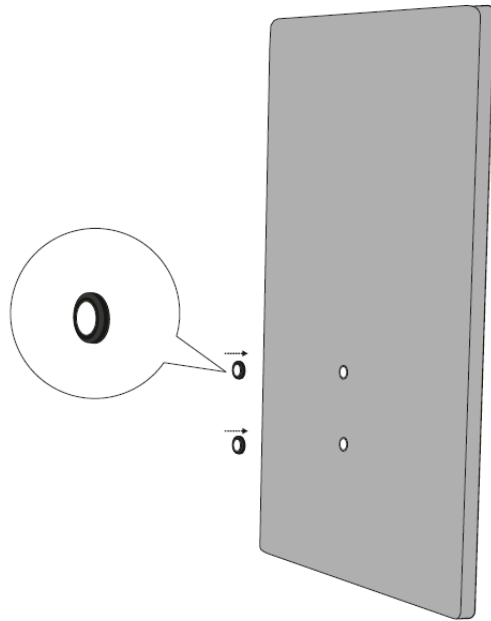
6. Installing a point sensor inside the wall, with the eye facing away from the bracket.
